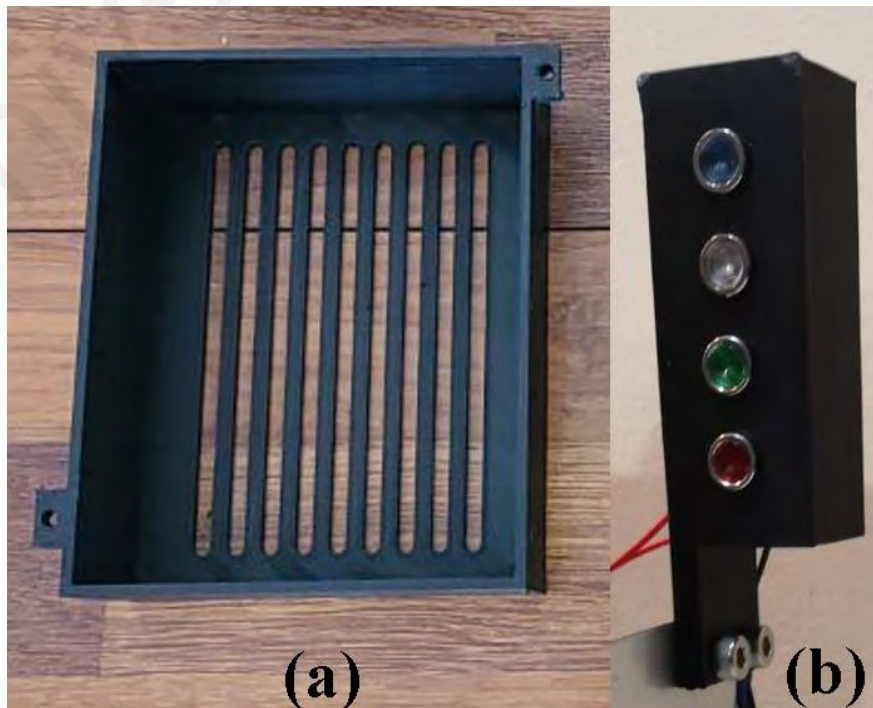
3D printed parts: a) ballast cover; b) LED indicator
